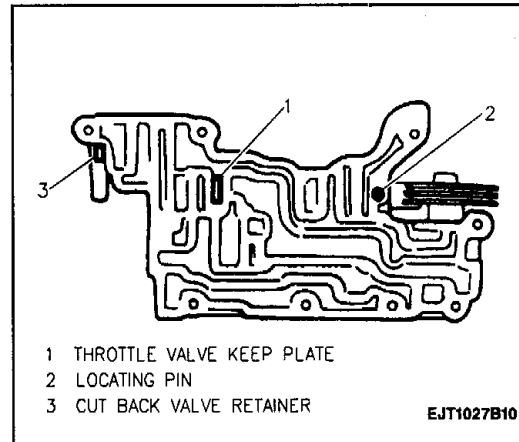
Inspecting Front Upper Valve Body Assembly (03-72LE, 4-Speed)
